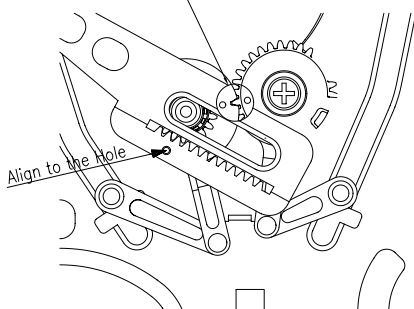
Assembly of the L/R LOADING AS and the LOADING RACK
